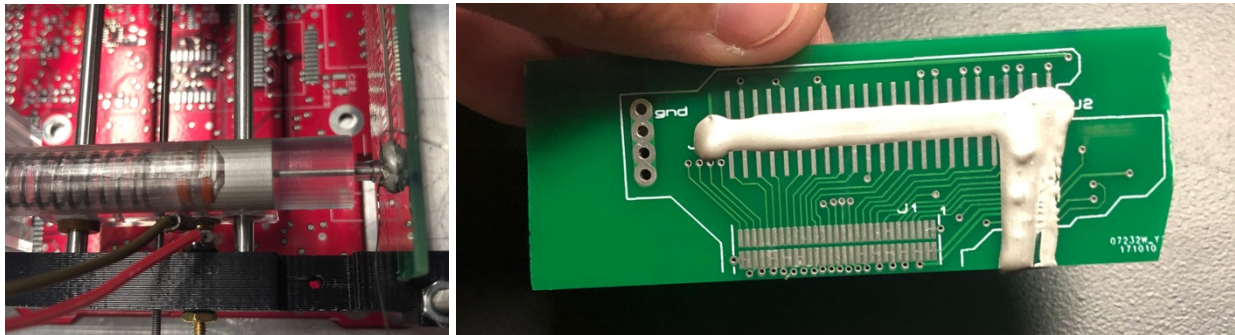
(a) Remaining ink inside nozzle after dynamic test, (b) Test PCB with ink trace deposition and dripping
